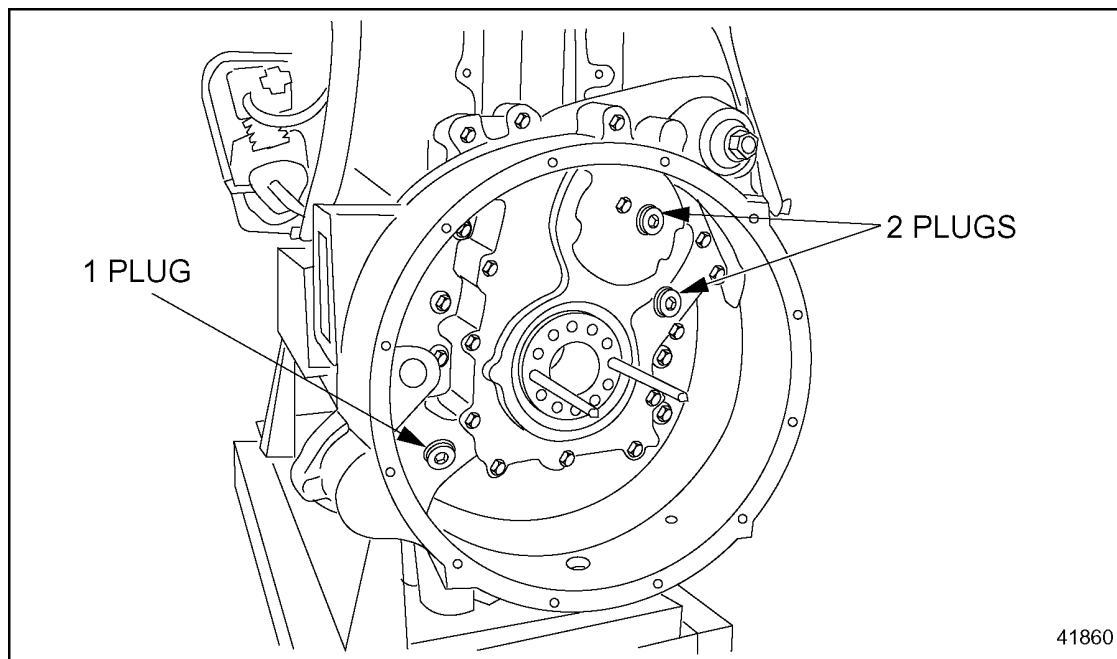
Pipe Plugs on the Gear Set Cover Plate
